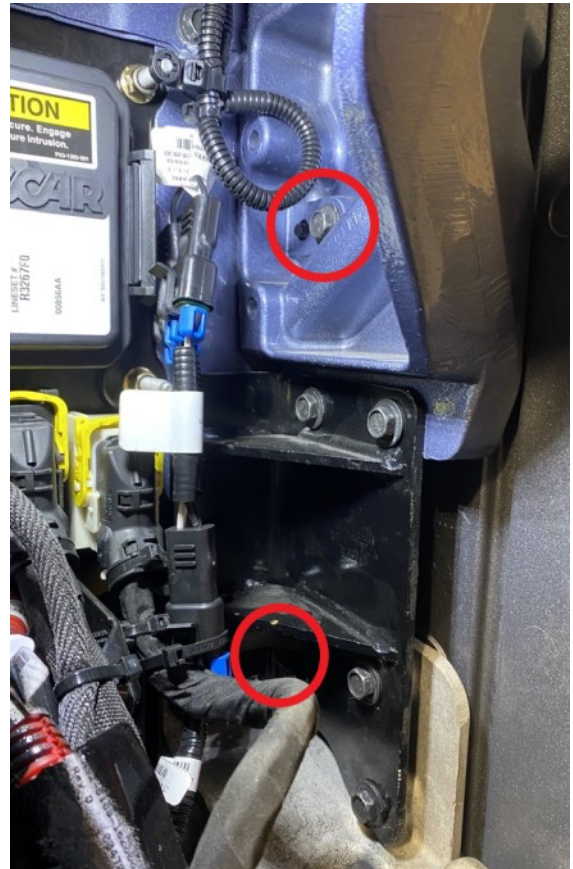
Last 2 Bolts to Remove (Driver Side Shown)
